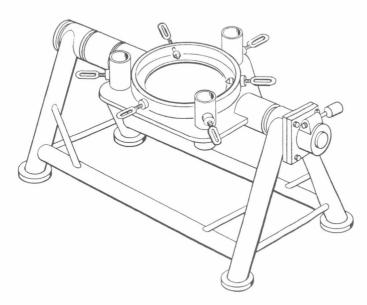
Typical stand or fixture for holding dissembled pieces of equipment. This particular stand is designed to hold the lower thrust structure from a nuclear rocket.
